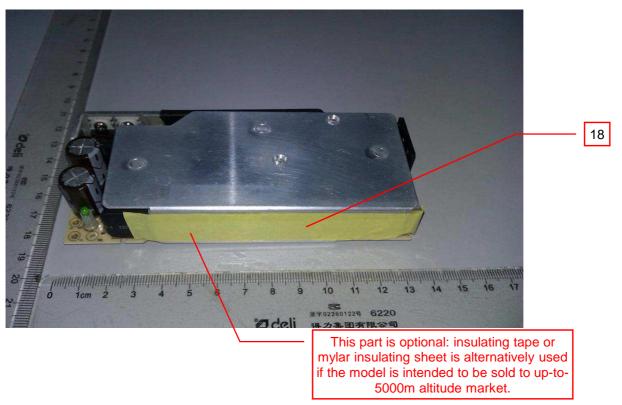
GT\*41133 series View of insulation protection on heatsink (2 layers of insulating tape or 2 layers of heat-shrinkable tube)
